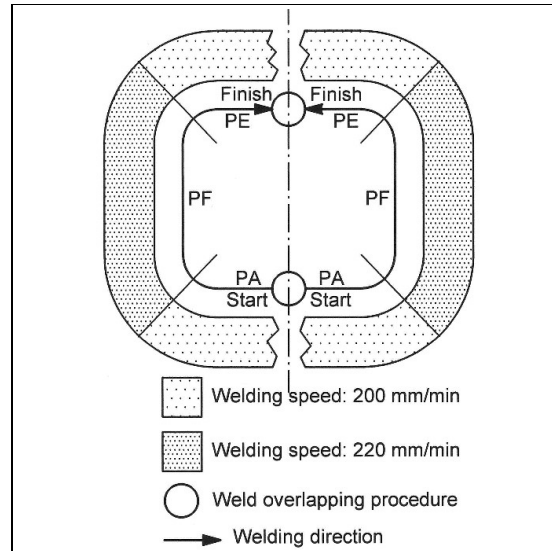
Schematic presentation of welding sequence arrangements that may be considered applicable to position welding of the inner edge of a circumferential joint.
